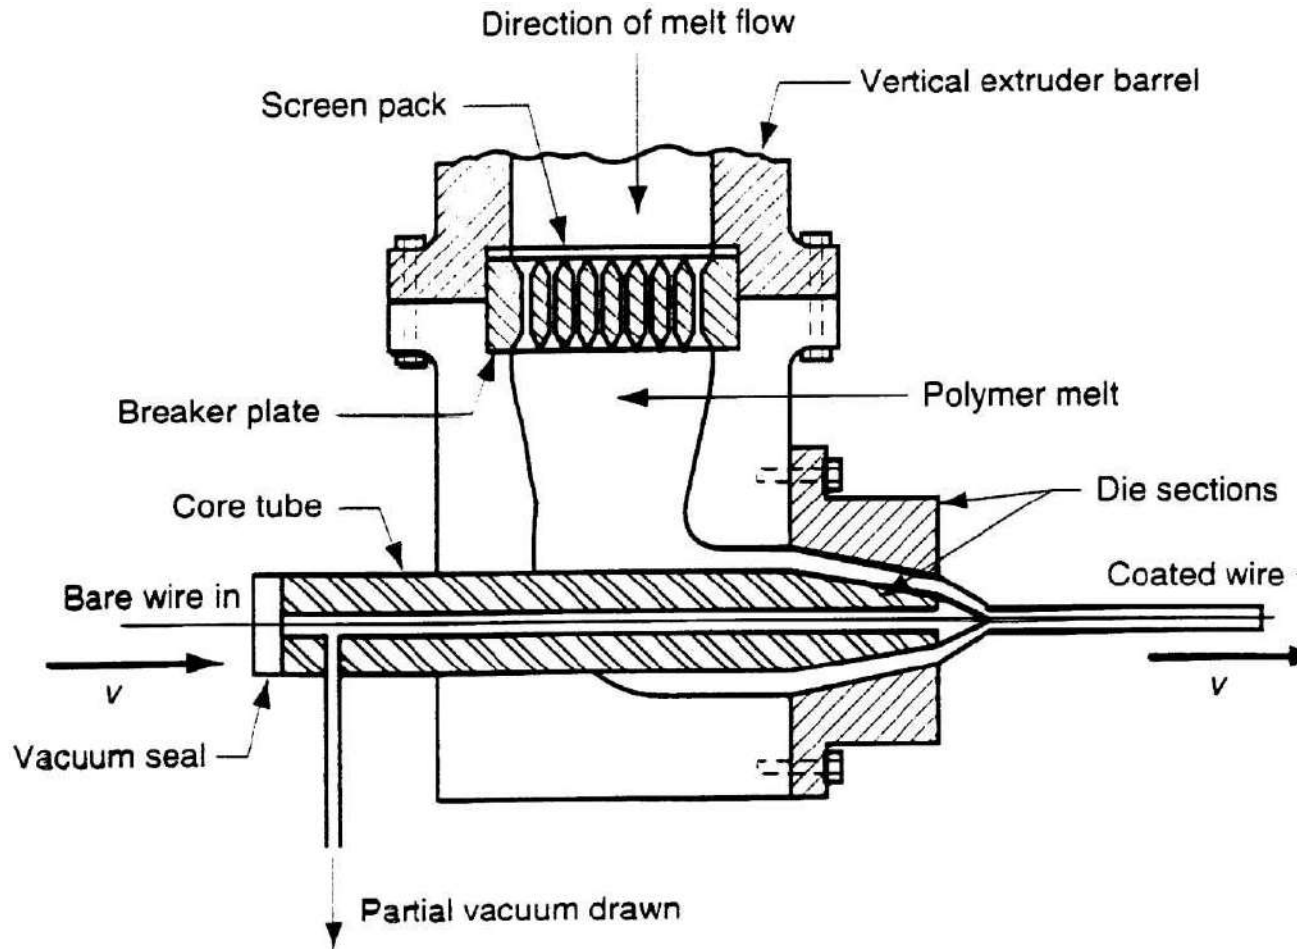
Side view cross section of die for coating of electrical wire by extrusion. (Some die construction details are simplified.)
